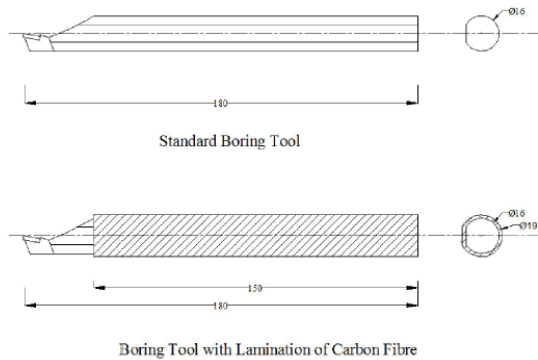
Schematic of a Standard and Laminated Boring Tool
